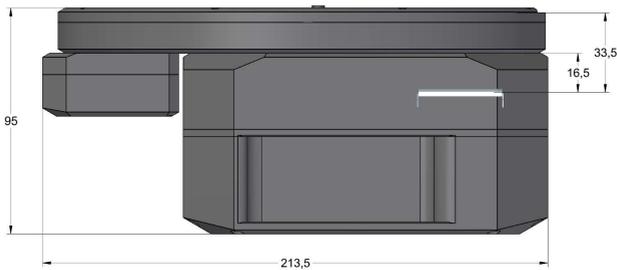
G3 camera head with Enhanced cooling and External filter wheel side view dimensions
